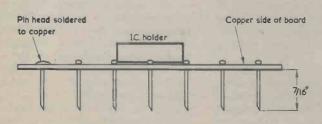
Side view illustrating the method of assembly. In practice, the i.c. holder is fitted to the board after all the pin heads have been soldered to their copper areas
